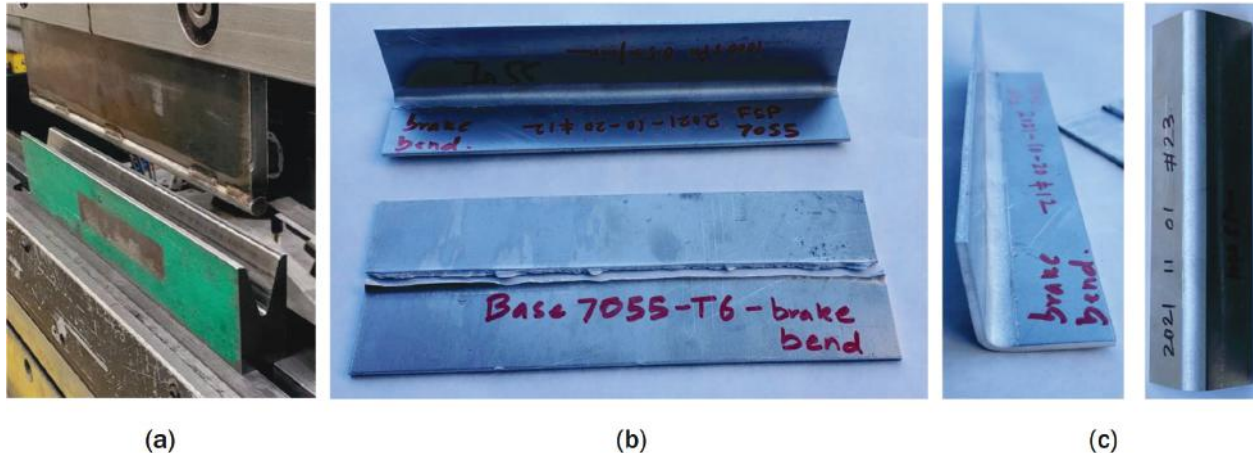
Press brake bending setup used to bend 7055-T6 sheets. (a) Press brake machine and its dies. (b) Brittle fracture of unprocessed 7055-T6 sample and a 90-degree bent FSP 7055-T6 sample. (c) Side view of FSP 7055-T6 showing 90-degree bend without any cracks and top view of FSP 7055-T6 bent sample with crown side on tension without any crack. Source: PNNL.
